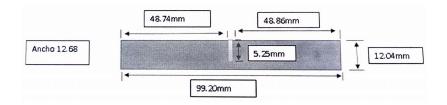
Dimensions of the test specimen bars used for the Charpy pendulum impact test [7].
